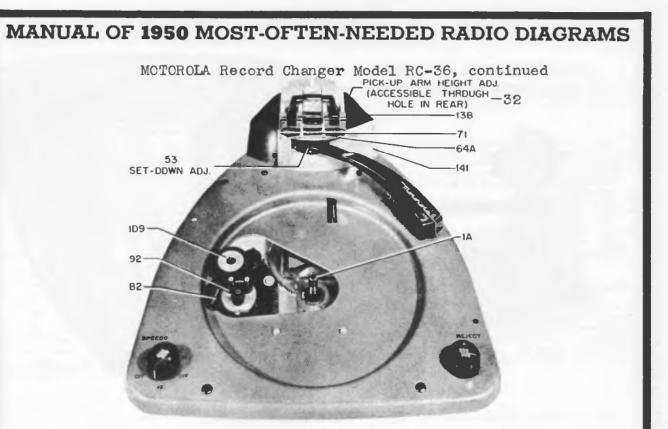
TOP VIEW OF RECORD CHANGER WITH TURNTABLE REMOVED
